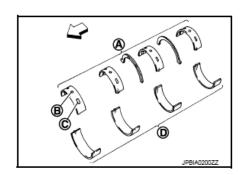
Identifying Thrust Bearings Courtesy of NISSAN MOTOR CO., U.S.A.
